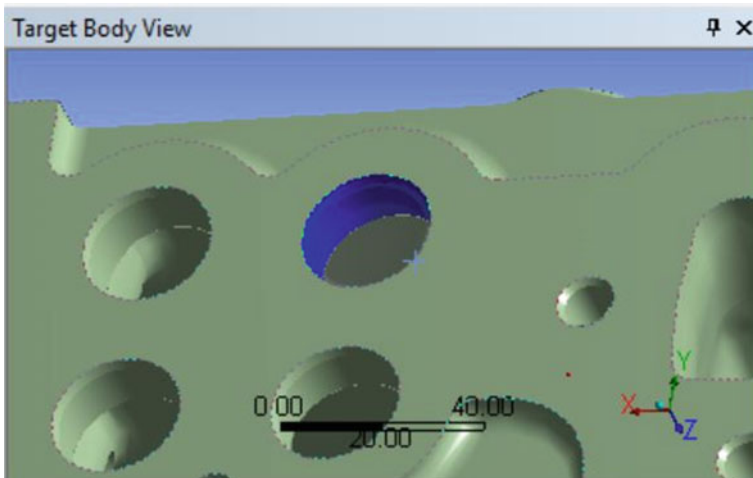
Target body view (cylinder head plug bore inner surface)
